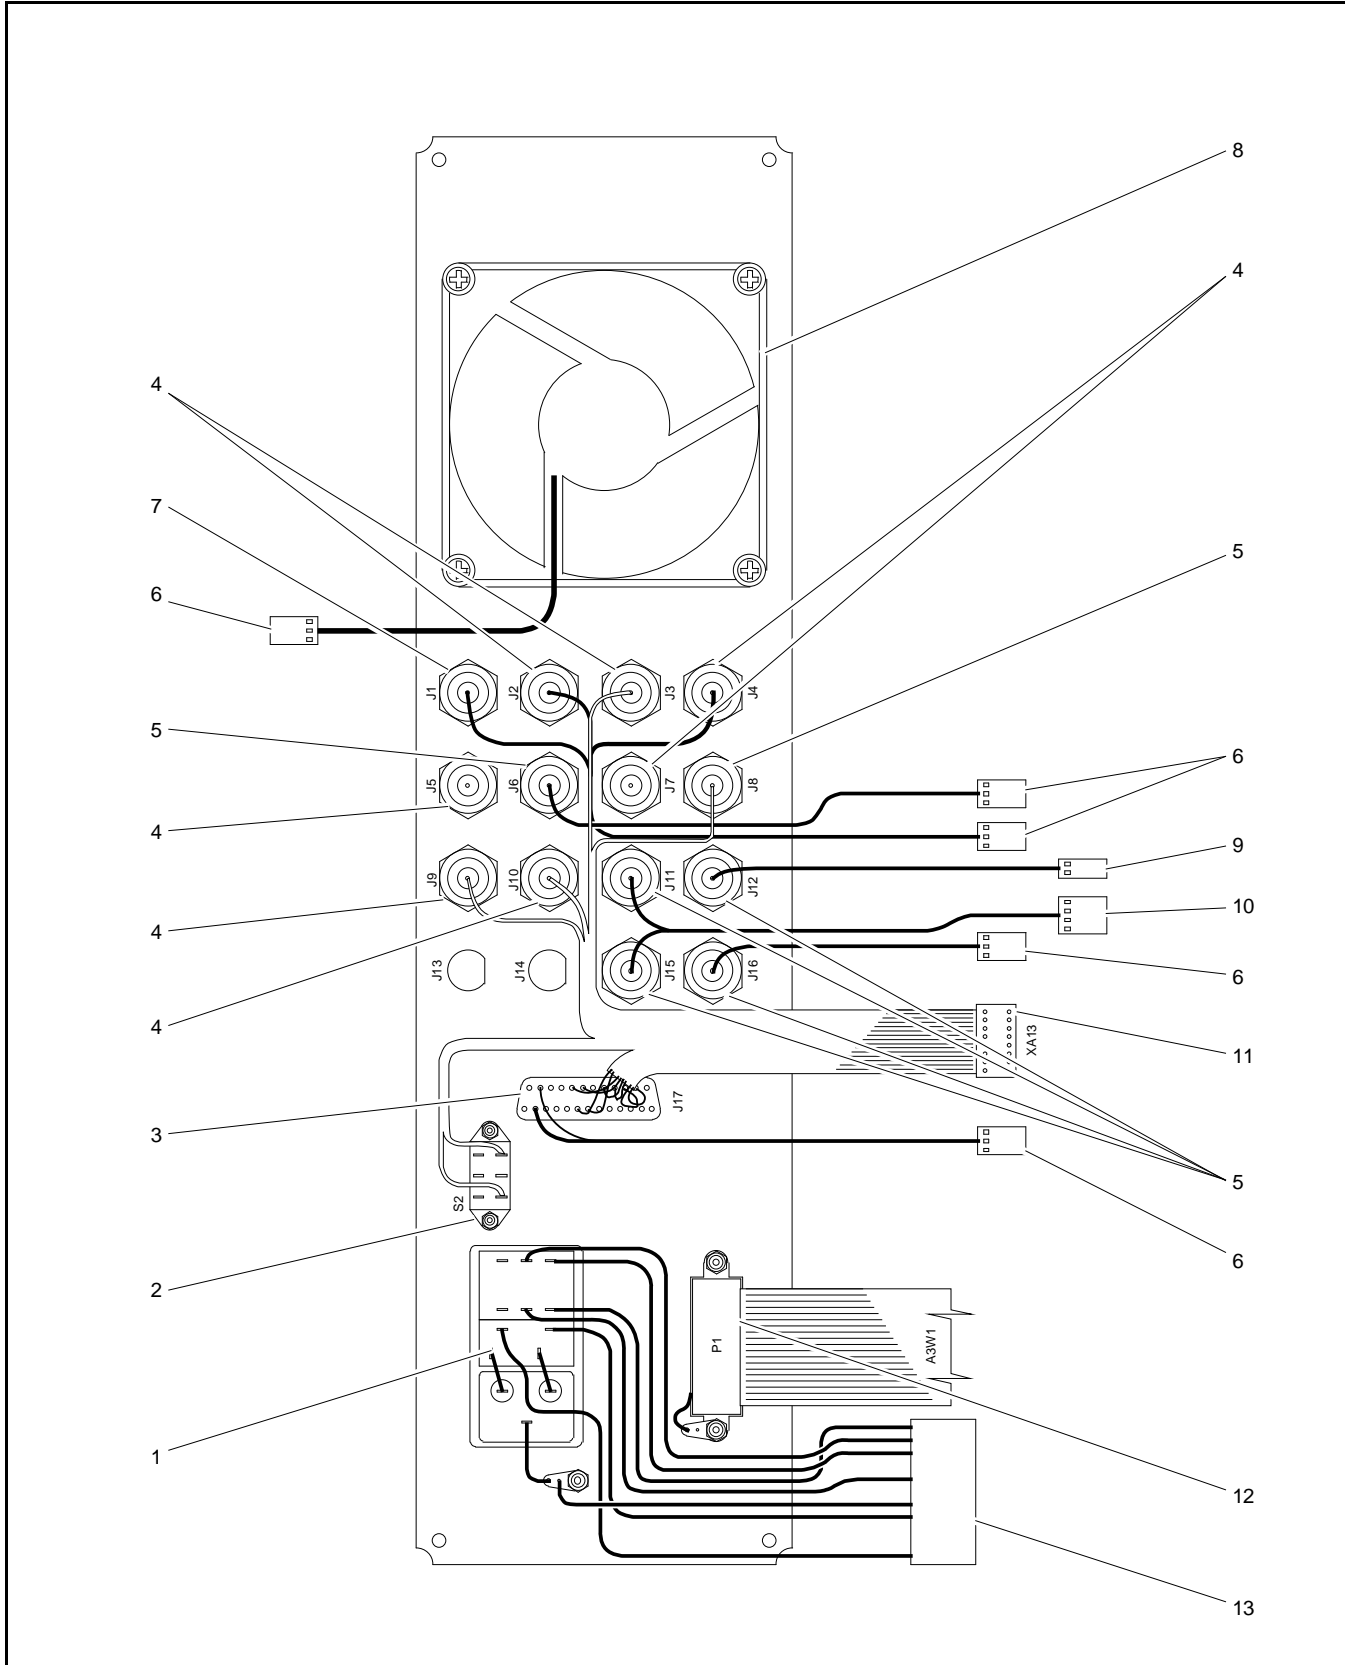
A3 Rear Panel Assembly Parts (1 of 2)
